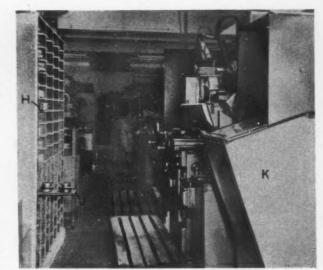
In this View of Part of the Grinding Section at the Uxbridge Works, the Jones-Shipman Machine for Crush-form Grinding is Seen towards the Right, with the Optical Projector Used for Inspecting Ground Workpieces. At the Left is the Special Rack which has been Built for Storing the Crushing-rolls and the Formed Grinding Wheels
